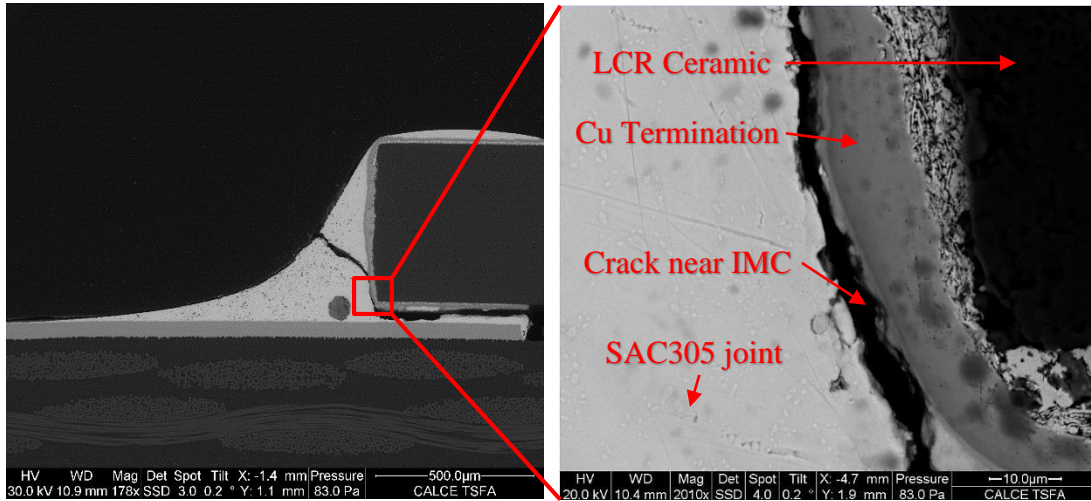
Crack through copper terminal interfacial IMC and bulk of solder fillet (Aged 500 hrs @ 125°C + 5 yrs RT)
